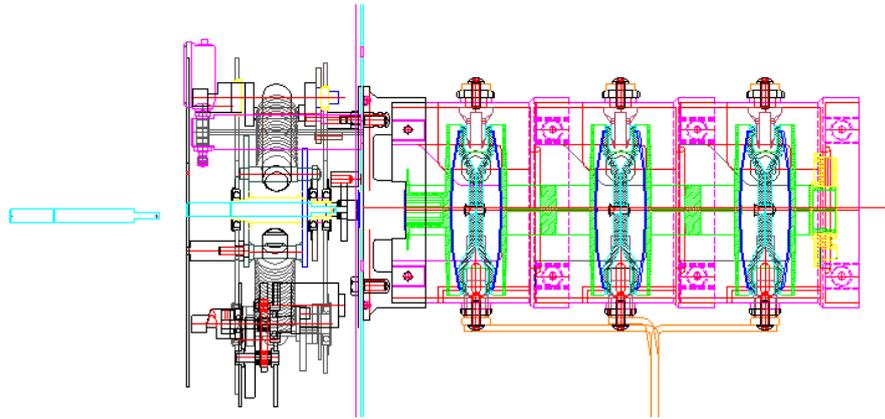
The drawing of the load break switch with the contacts and the mechanism
